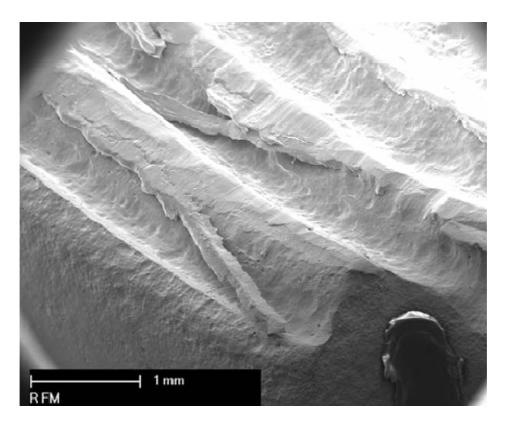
Scanning electron microscope image of threads at mouth of piston rod, showing shearing off of thread tops during final disengagement.
